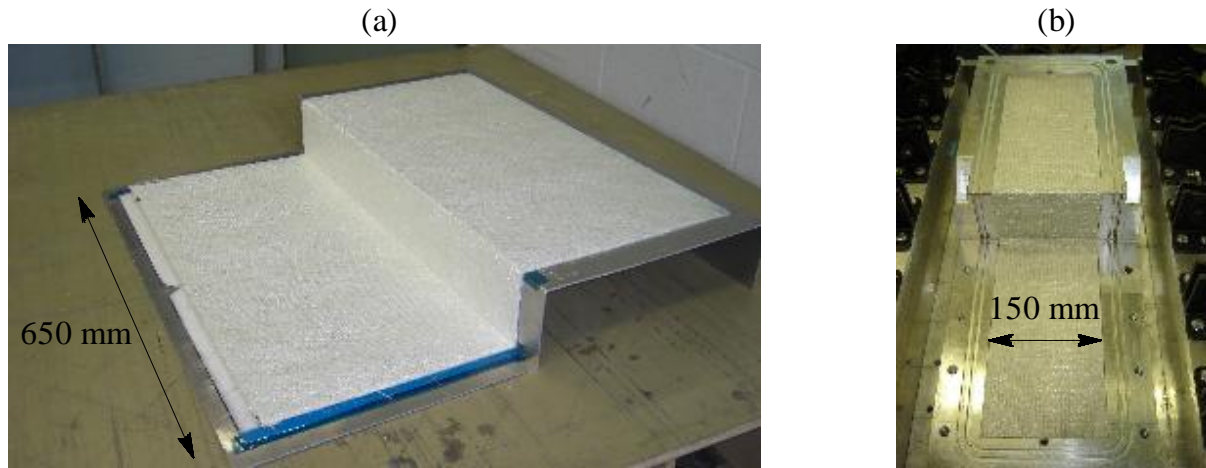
Preparation of the fiber bed: (a) demolding of the large preform; (b) small preform cut to the required dimensions and laid into the bottom mold.
